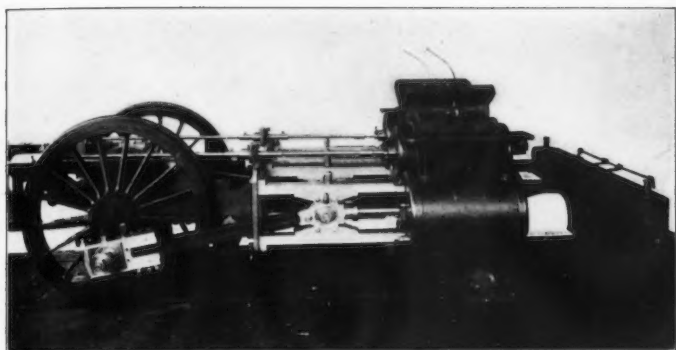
SIDE VIEW OF CYLINDERS AND DRIVING WHEELS.
